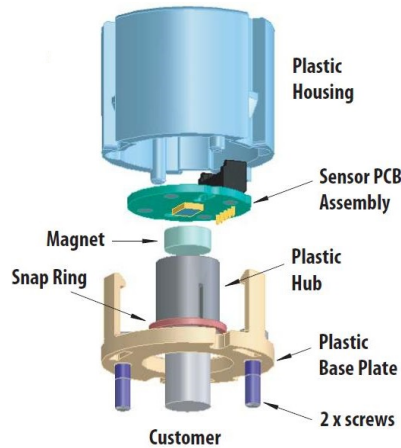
Exploded view of AEAT-6012 mechanical assembly, adapted from [40]
